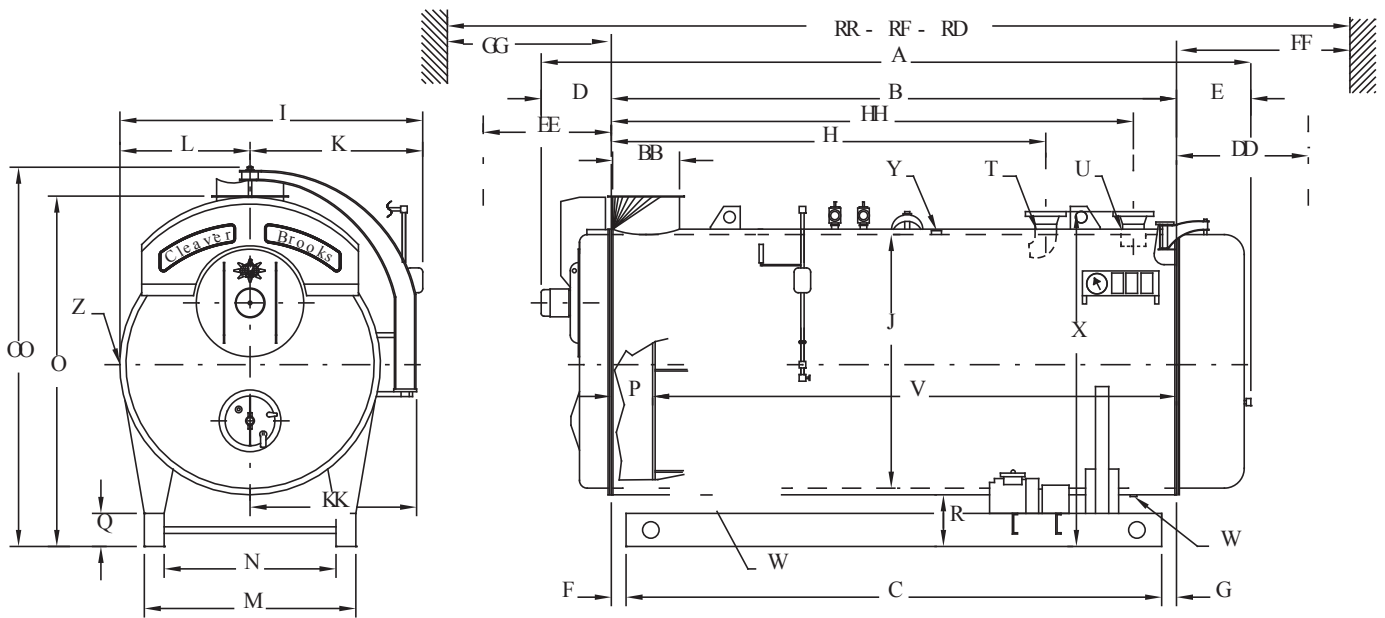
Dimensions CBLE Hot Water 250-350 HP
